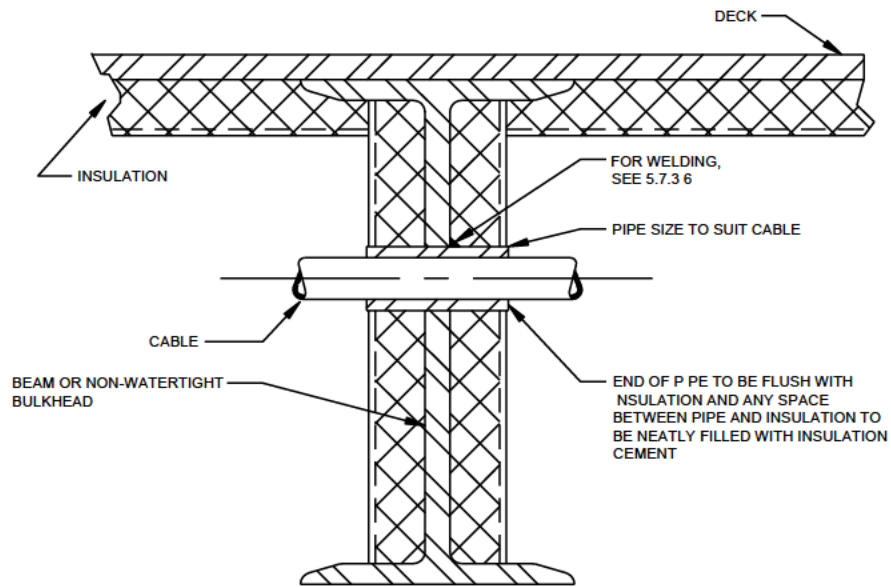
C30. Cableway through non-watertight bulkheads and beams without fire stops.
